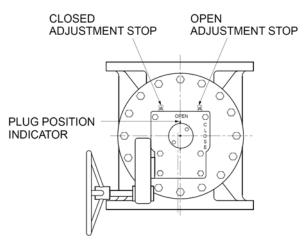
GEAR ACTUATOR ADJUSTMENT
